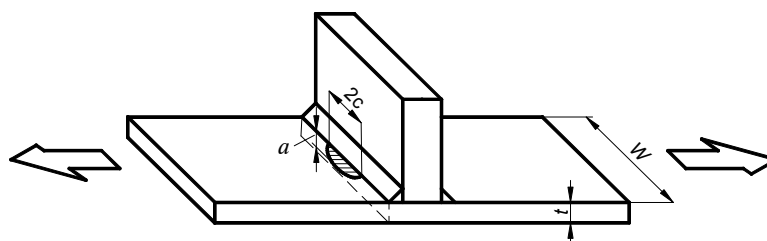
Welded joint ($t = 8 \text{ mm}$)
